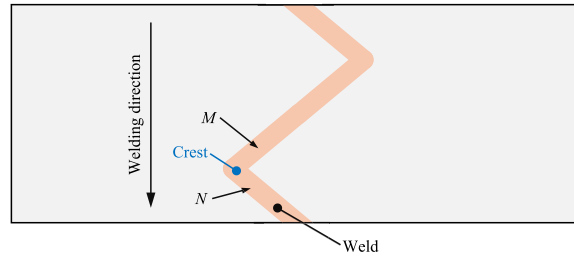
Illustration of pre-heating and post-heating in the crest region of the bio-inspired weld.
